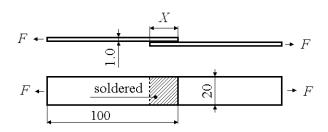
Dimensions of the test assembly X – overlapping length; F – force needed for soldered joint failure
